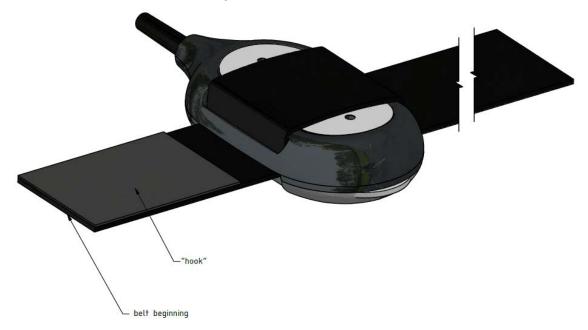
Way of inserting the hook-and-loop belt through the head eyelets
